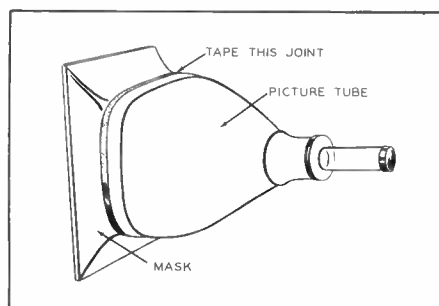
Details for Sealing Crack Between Picture Tube and Mask.
